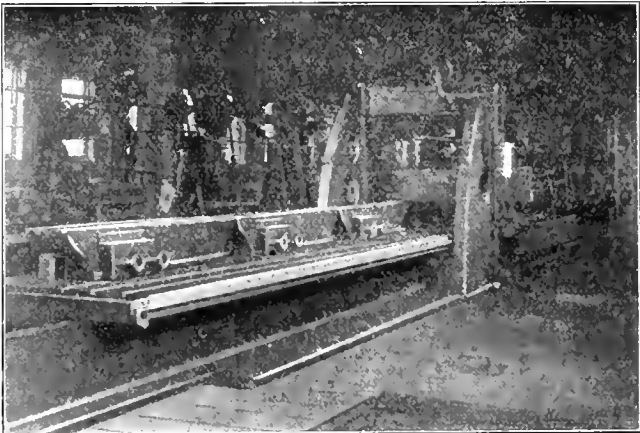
Planing Four Small Planer Beds on a 34-foot Planer
